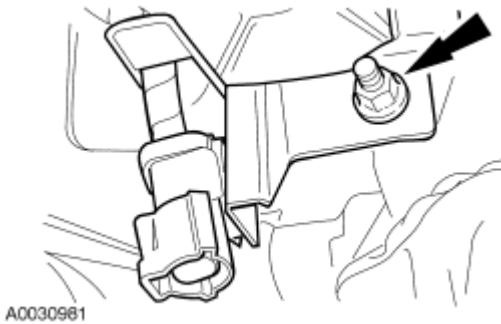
Locating Catalyst Monitor Sensor Electrical Connector Bracket Nut
